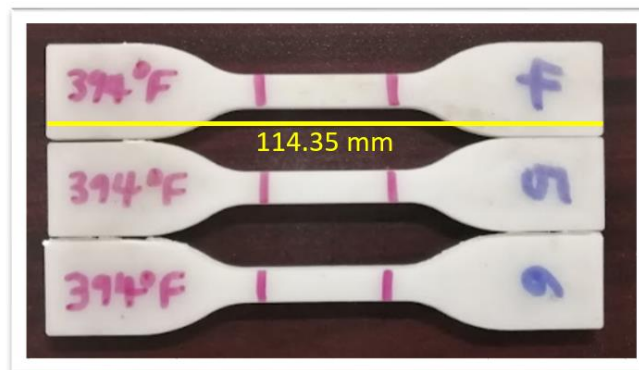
PLA-SEBS 50/50 plastic injection molded samples set for tensile test.
